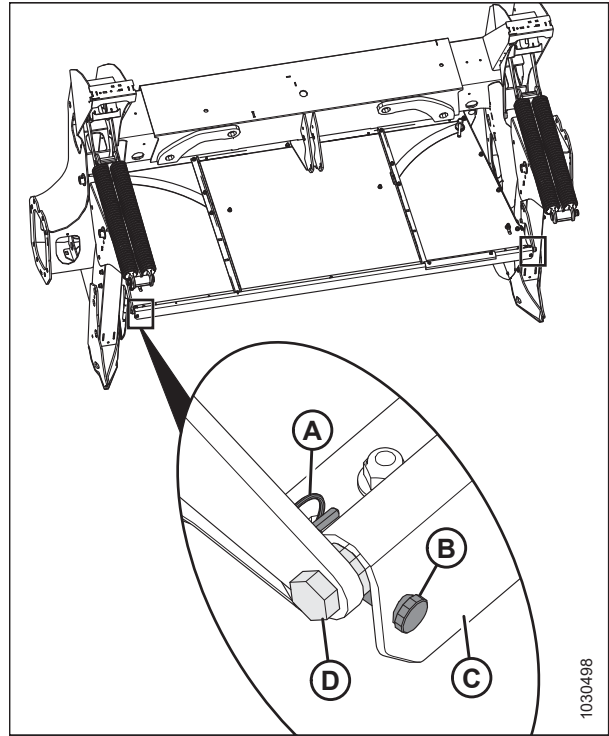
Forming Shield Secured to Front of Windrower Legs
